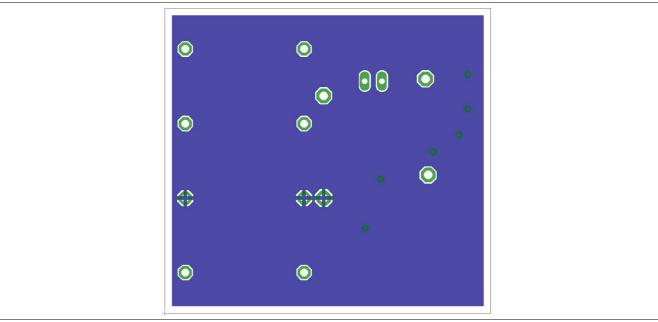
Bottom Layer of TLS202B1 Demonstration Board
